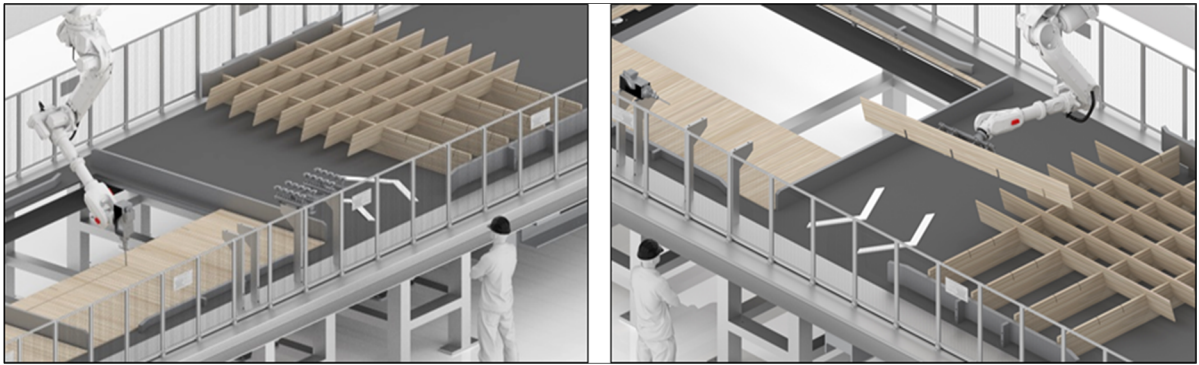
Manufacturing and assembly of the canopy elements with a robotic arm cell equipped with a tool changer
